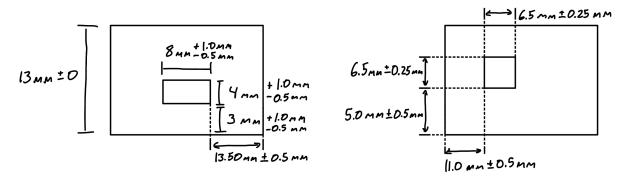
Sketch of Basic Tolerances of the Electronics Housing
